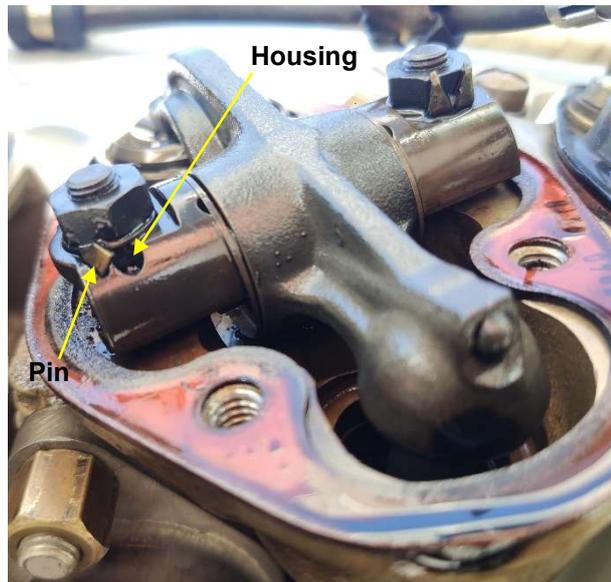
Photograph of exhaust valve rocker arm cylinder no. 3, engine IO-240-B32, s/n: 1035257.
